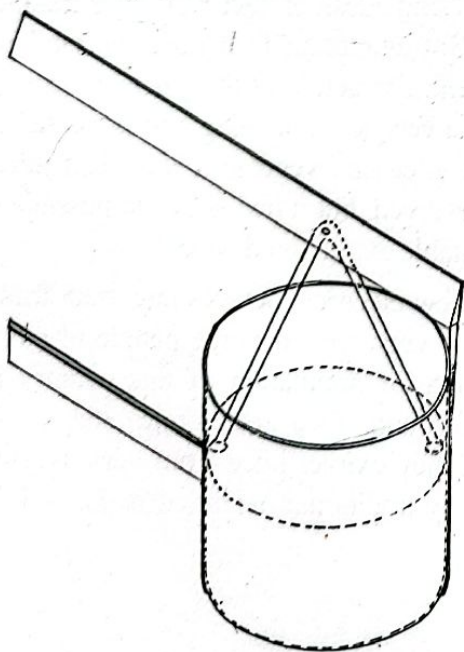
ISOMETRIC VIEW OF HAND OPERATED JACK FRUIT JUICE-EXTRACTOR
